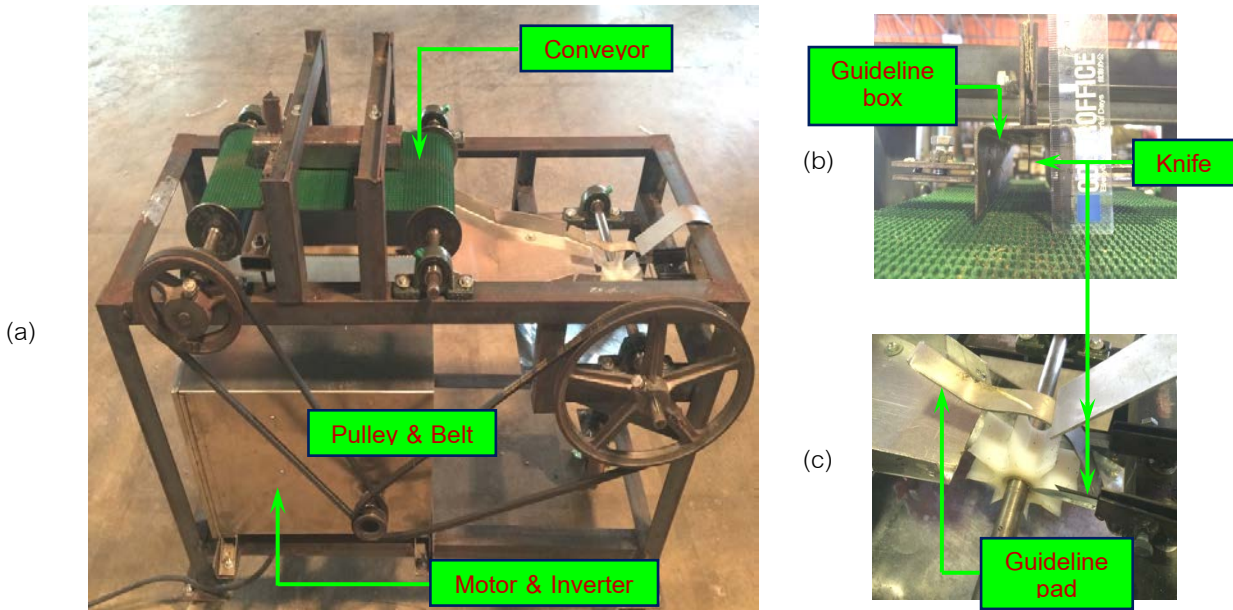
(a) Salacca peeling machine (b) a peel slitting part (c) a peel cutting part
